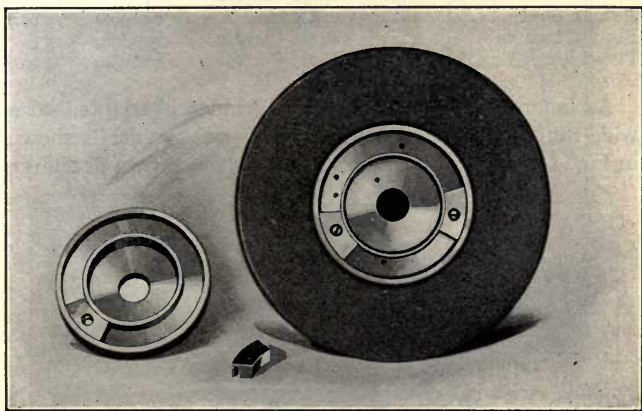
Landis wheel-holder equipped with balancing blocks.
